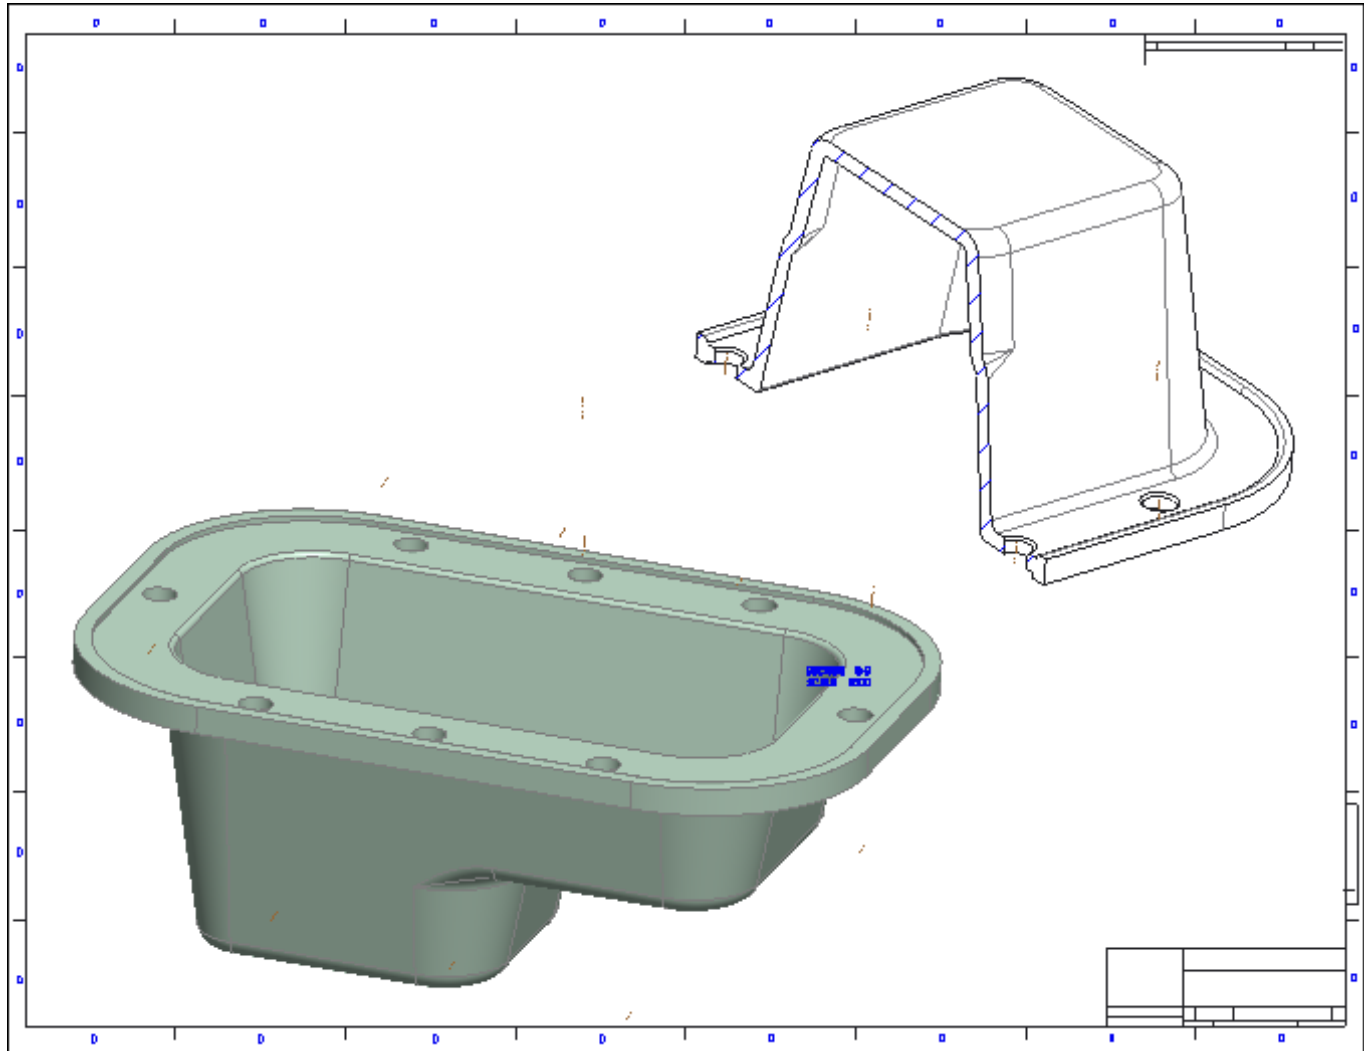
(c) Oil Sink Detail Drawing, Sheet 1
